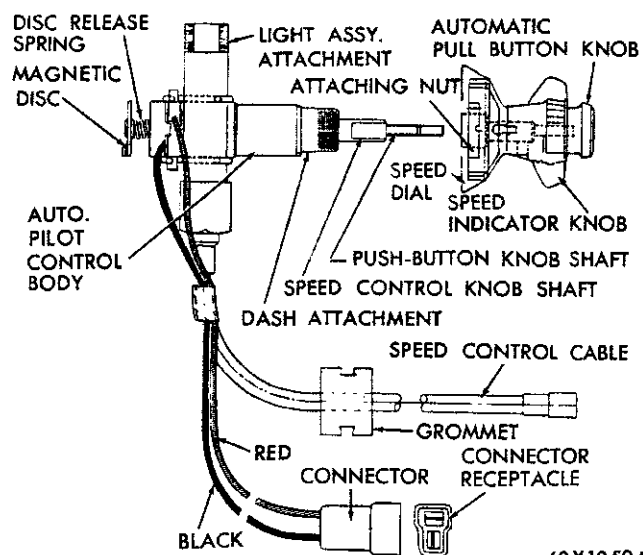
Auto-Pilot Selector Control Assembly (Schematic View)
